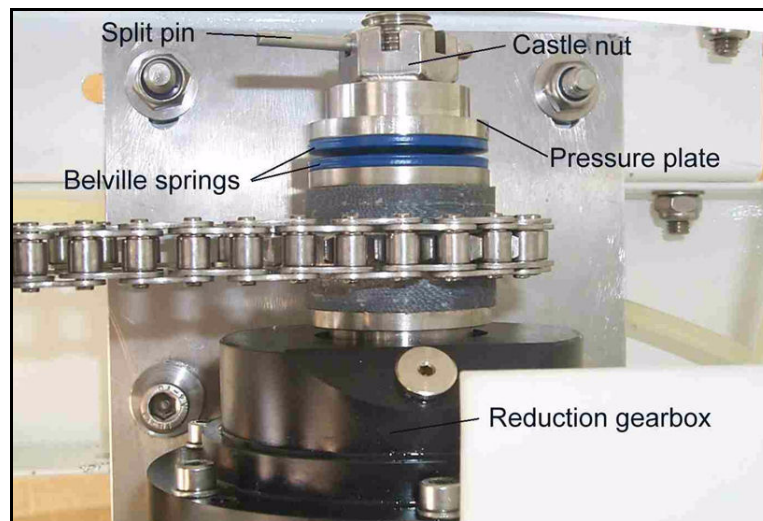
Reduction Gearbox Clutch Adjustment
